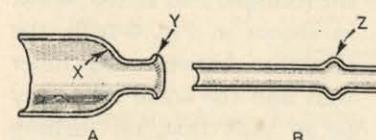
MAKING THE INTERNAL SEAL
